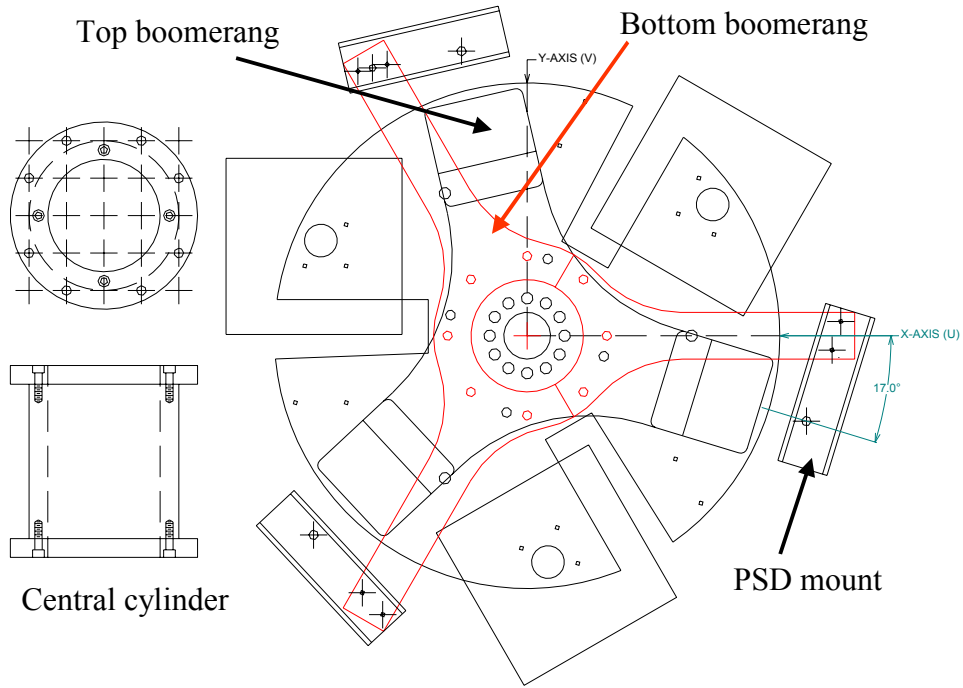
Design of Support System (Top View with Side View of Central Cylinder)
